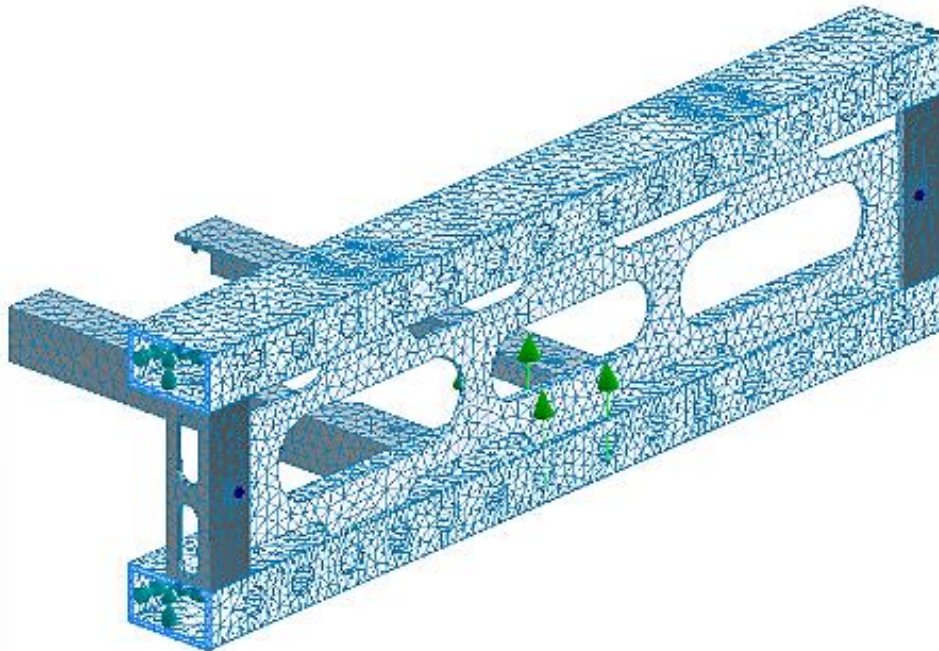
Bending moment calculation model for critical weld section 2.
